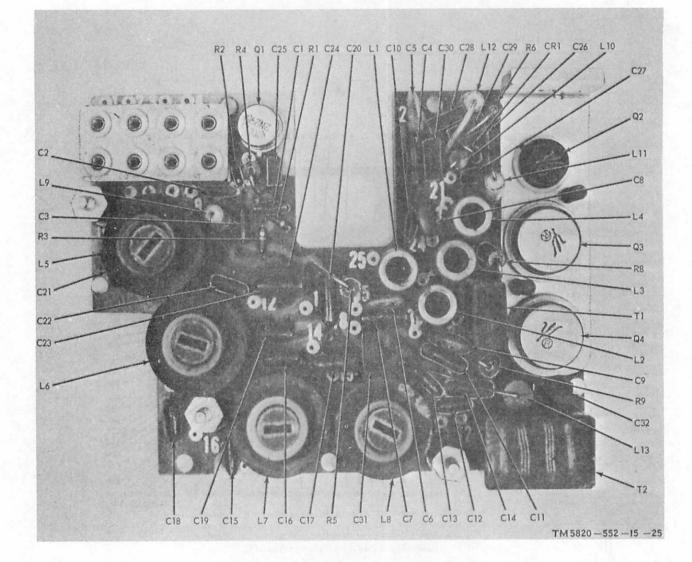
Parts locations, transmitter assembly A4A9A2.
